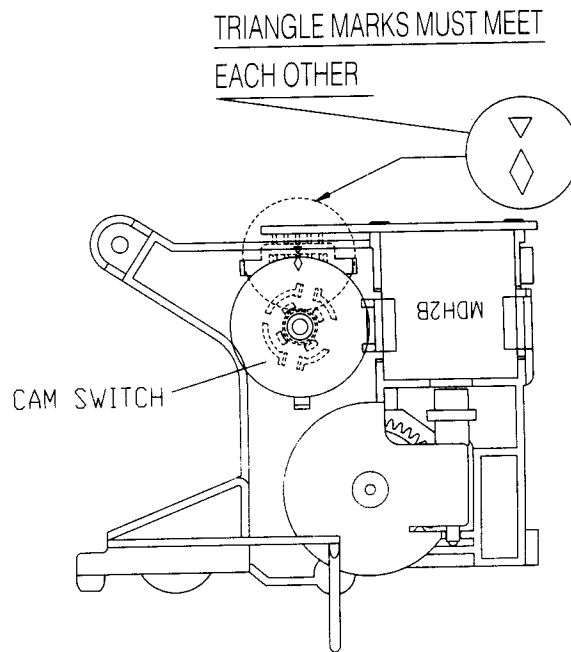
DATUM POSITION OF CAM SWITCH TRIANGULAR MARKS
